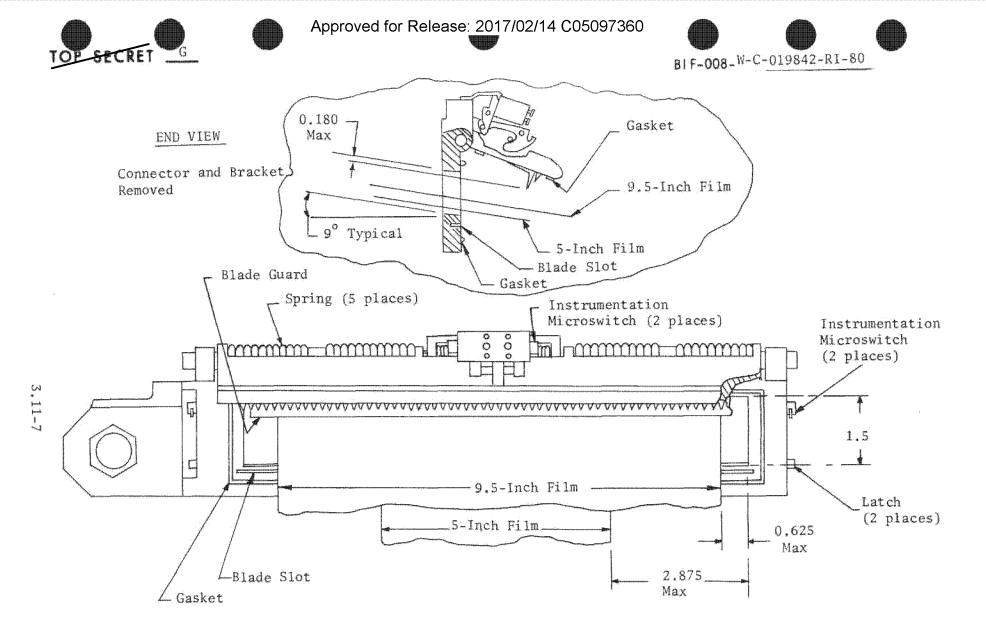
Cutter/Sealer Assembly (Open)
